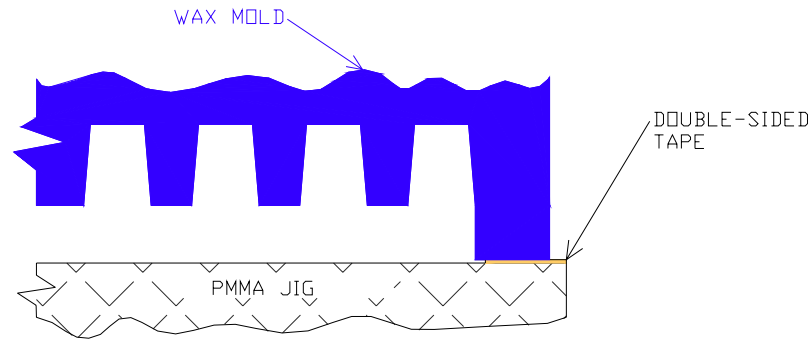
Cross-sectional View of Wax Mold Taped to PMMA Surface
